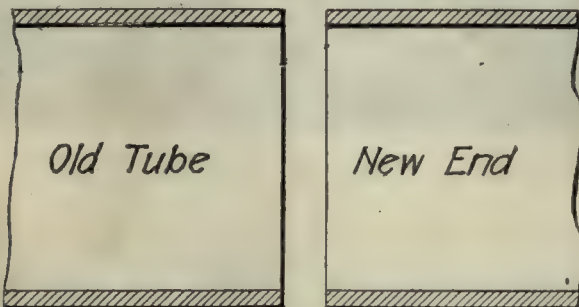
ENDS PREPARED FOR A STRAIGHT BUTT-WELD
